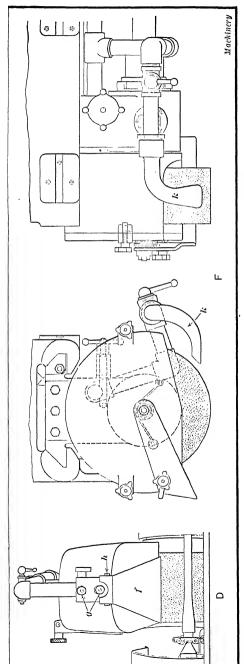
Additional examples of Distributors for Delivering Coolants to Grinding Wheels
